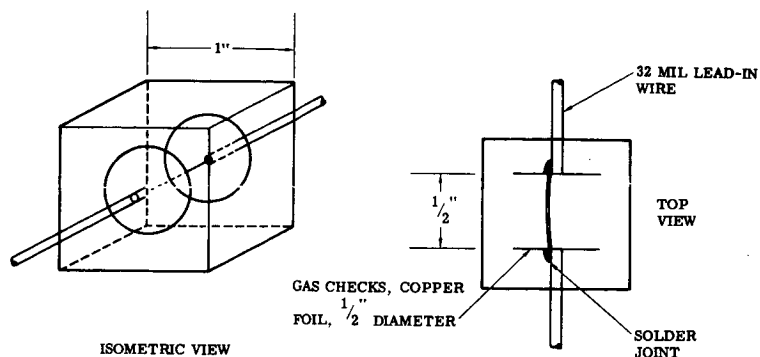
Exploding Wire Sample Configuration, With Gas Checks.
